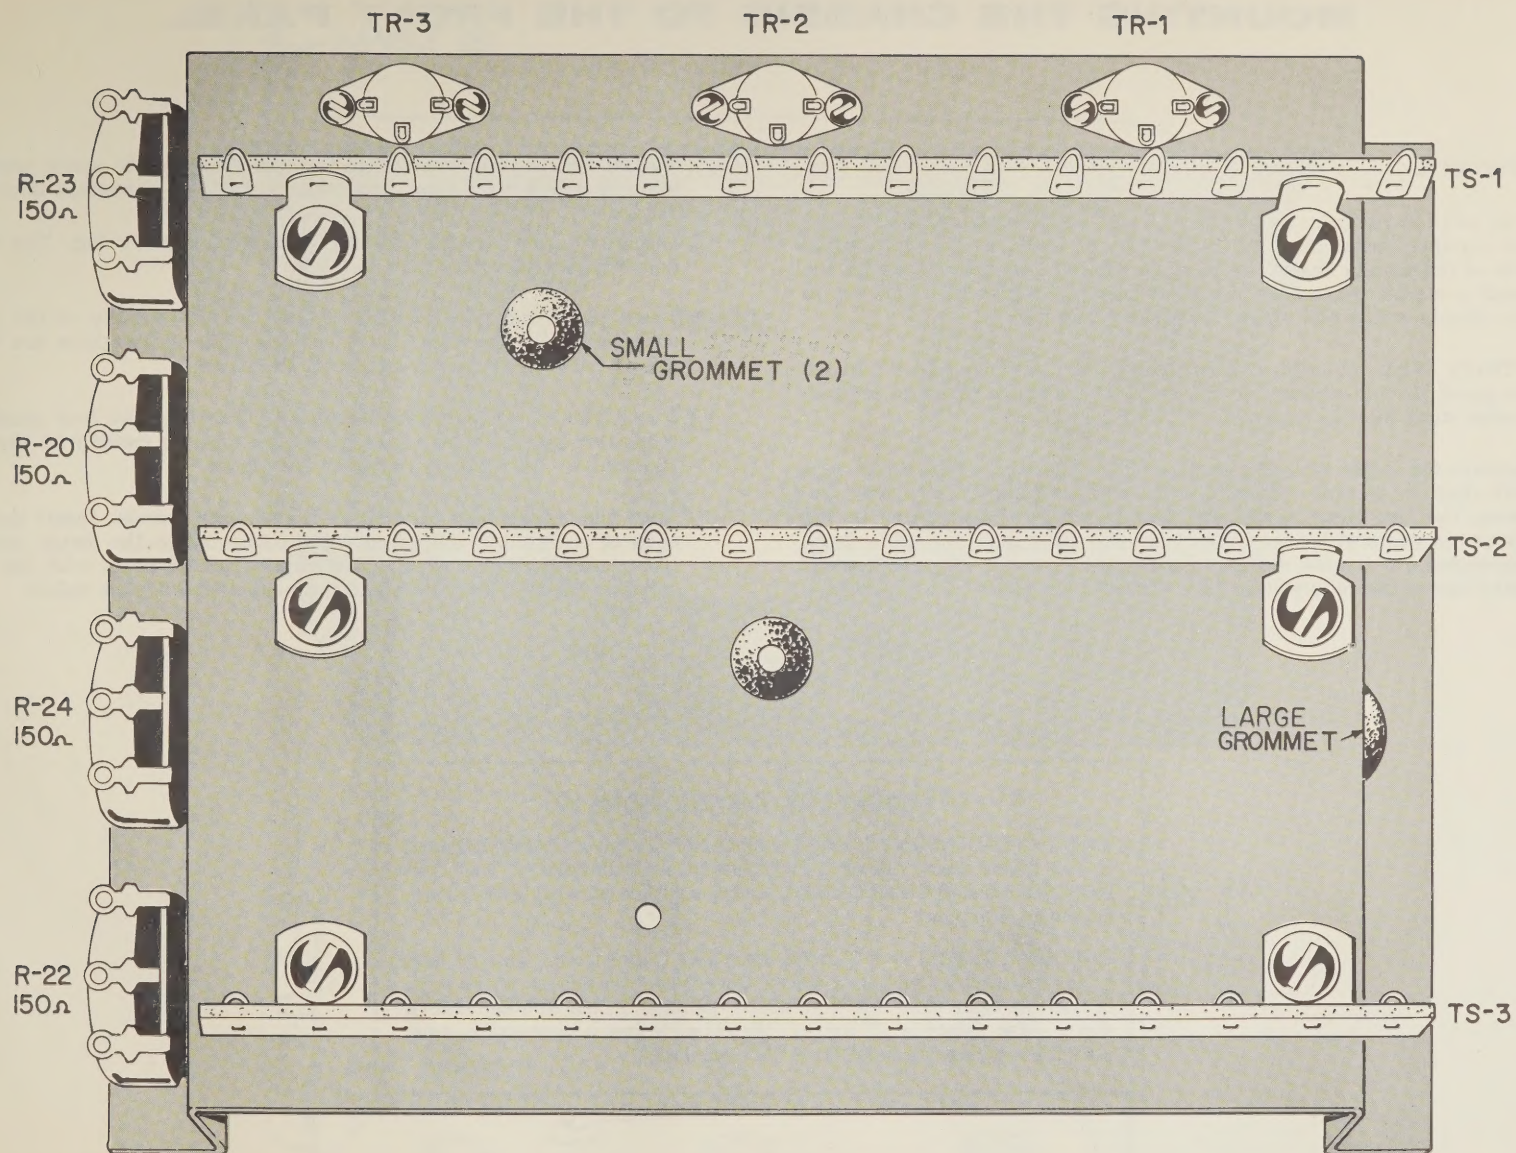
PARTS MOUNTING ON THE CHASSIS
